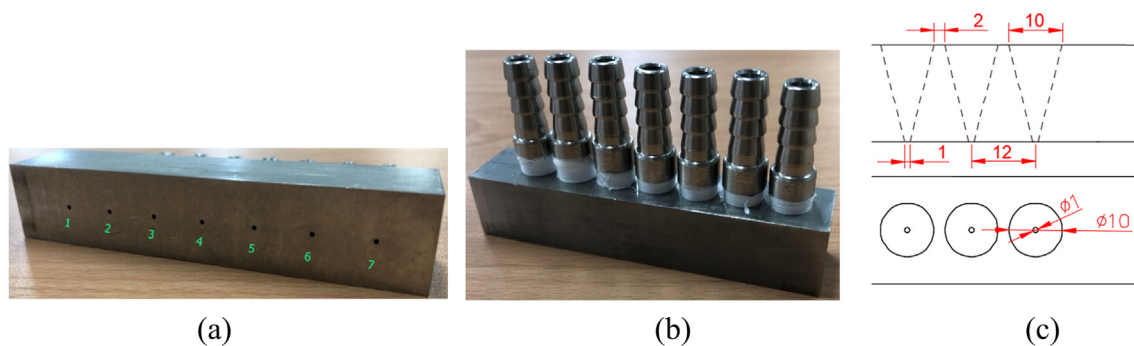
The feeder and the details of the drilled holes. (a) The nozzles tips, (b) the mounting fittings, (c) the details of the drilled nozzles-holes (units in mm).
